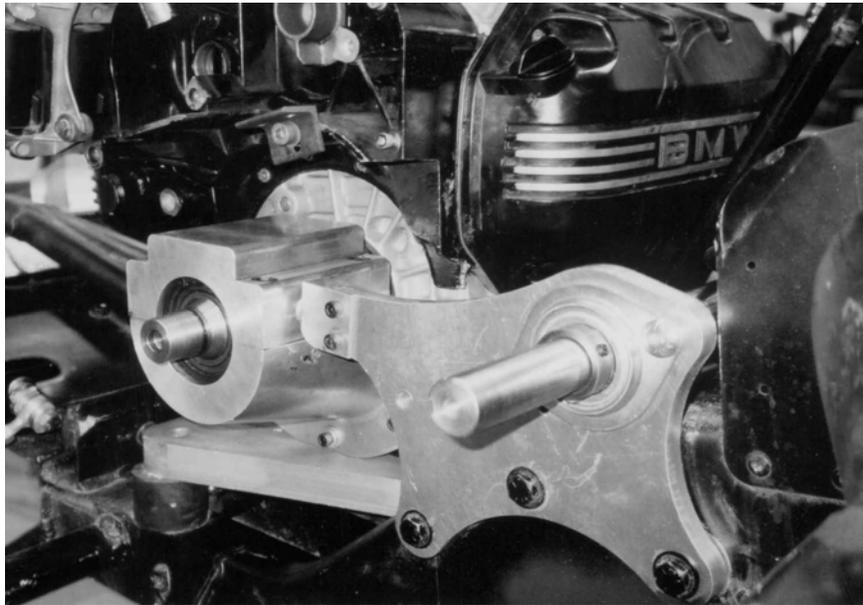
Bearing carriage, motor mounting plate, and support foot.
